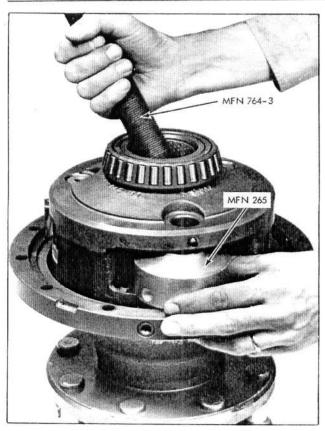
Special Tool MFN 265 and MFN 764-3 Installation or Removal
